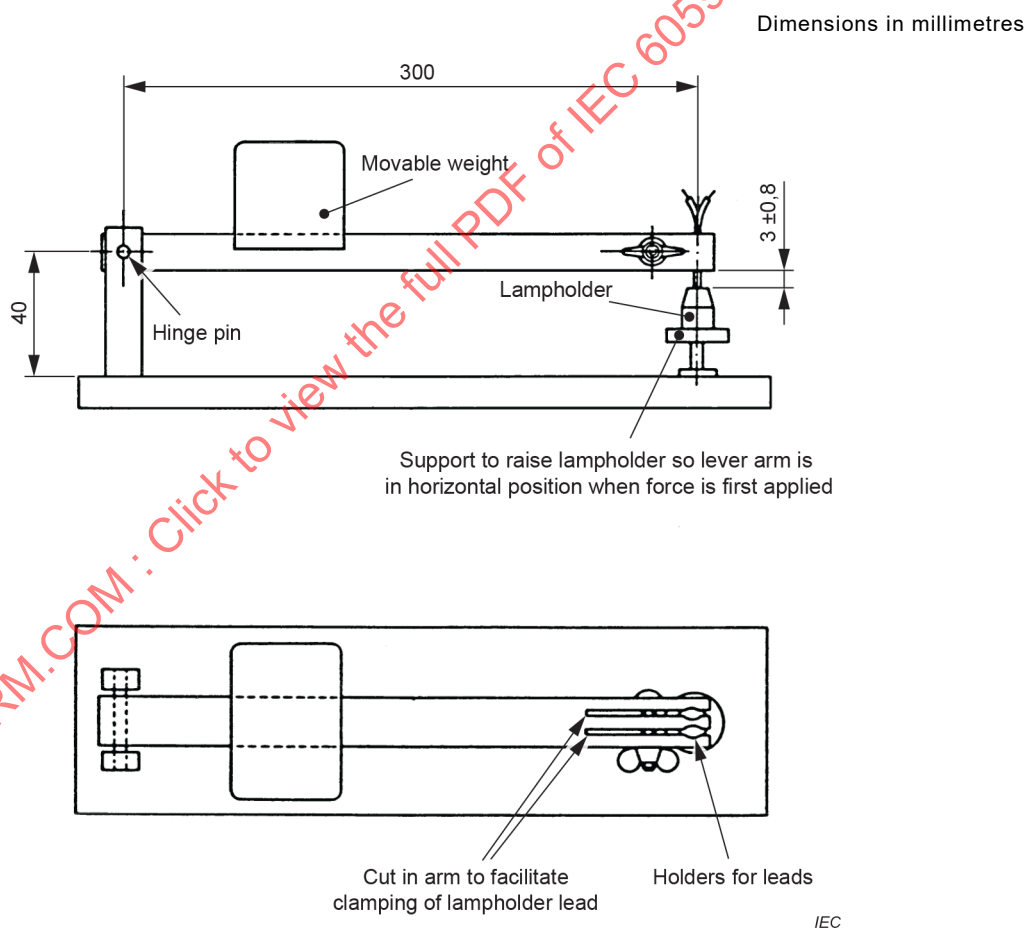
Example of test device suitable for checking security of lampholder contacts
